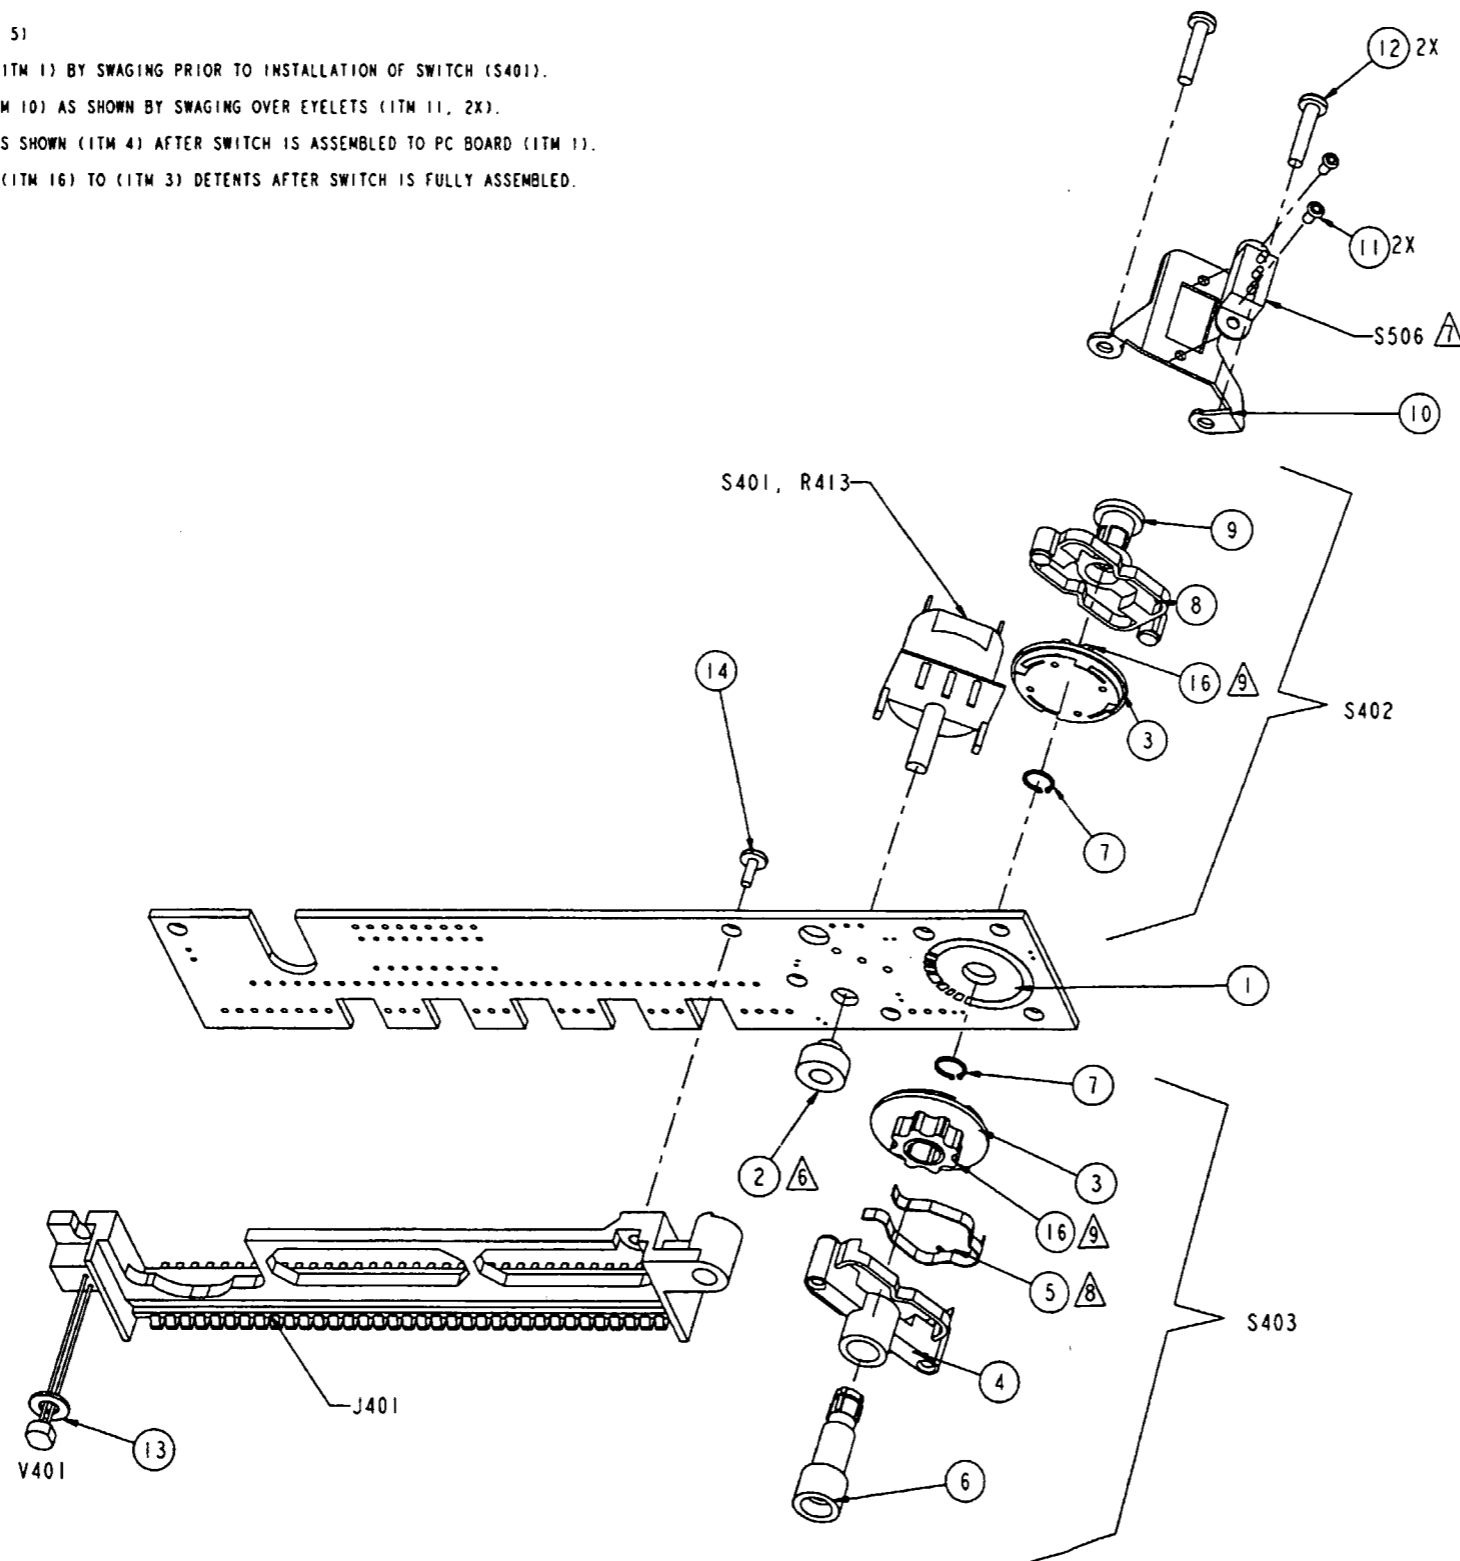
KR 87 DISPLAY BOARD ASSEMBLY
